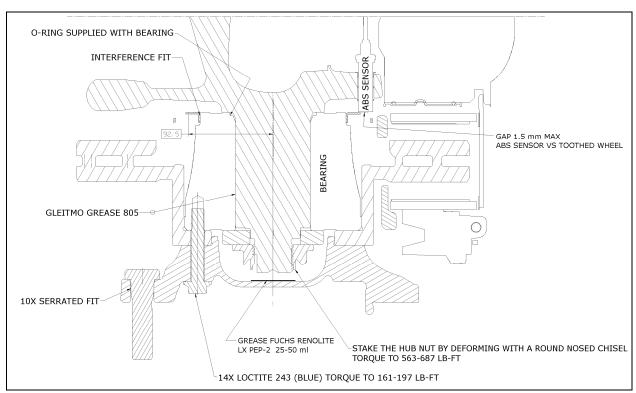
FRONT & TAG AXLE WHEEL HUB
